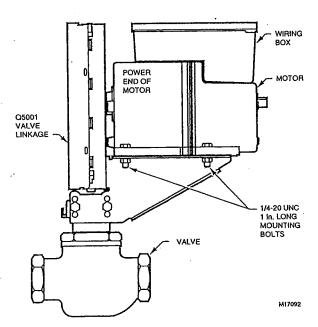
Mounting the motor on a Q5001 Valve Linkage.
